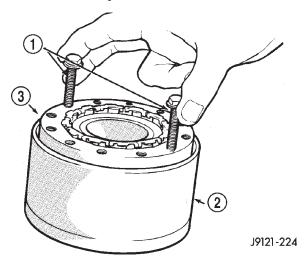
Removing Overrunning Clutch From Low-Reverse Drum
